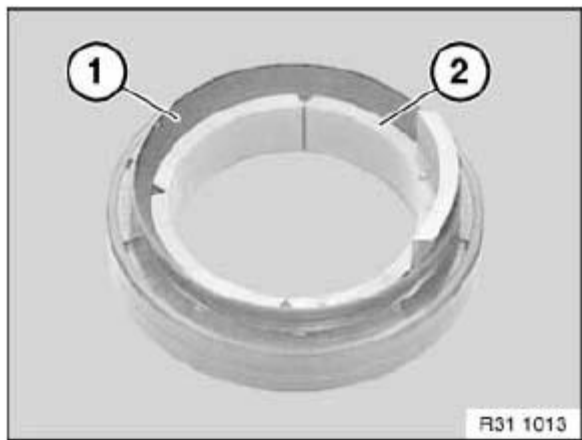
Identifying Protective Sleeve And Shaft Seal
